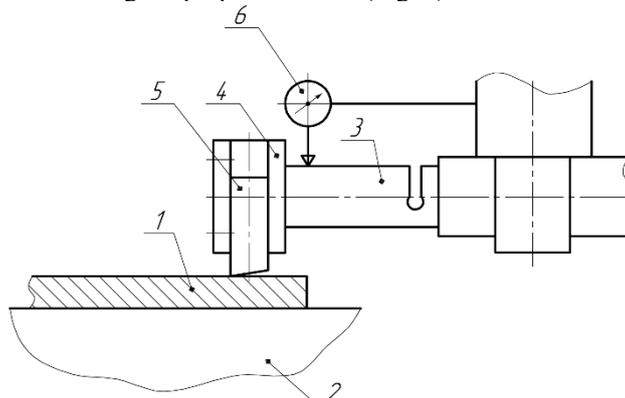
Microcutting research setup: 1 – sample made of anti-friction material; 2 – machine table; 3 – microcutter mounting device; 4 – mounting head; 5 – replaceable microcutter; 6 – indicator head
